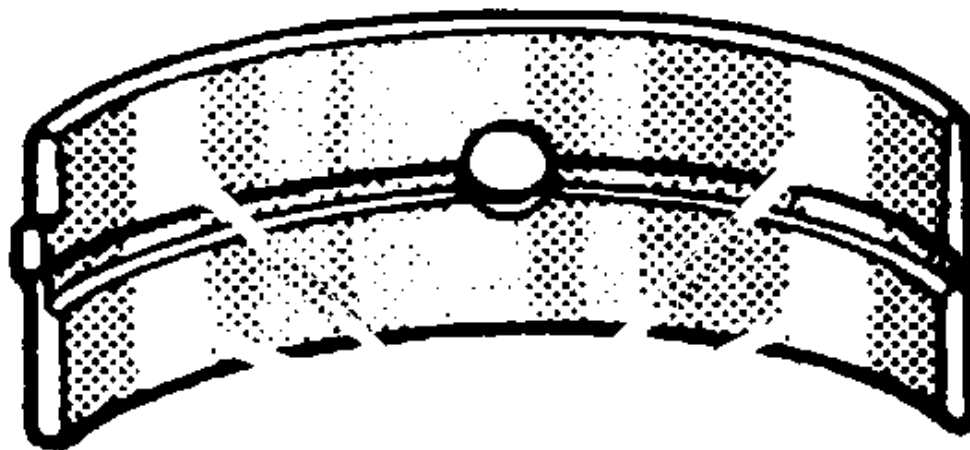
Crankshaft Bearing Polished Sections (Improper Seating)
